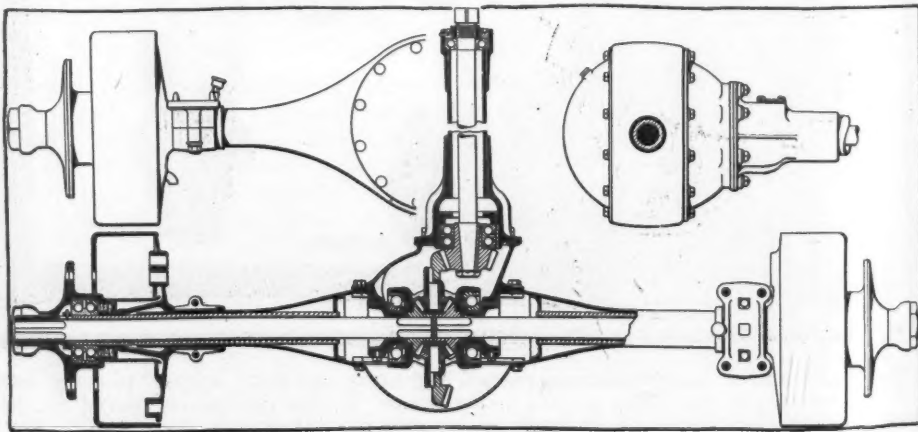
SECTION OF LATEST WESTON-MOTT FLOATING AXLE
